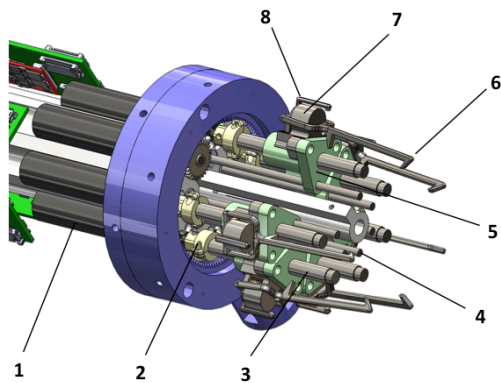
Detailed view of the linear actuators: (1) motors, (2) motor couplings, (3) 6mm leadscrews, (4) stability rods, (5) lead screw nuts, (6) slider hook, (7) load cell holders and (8) load cell pressing element.
